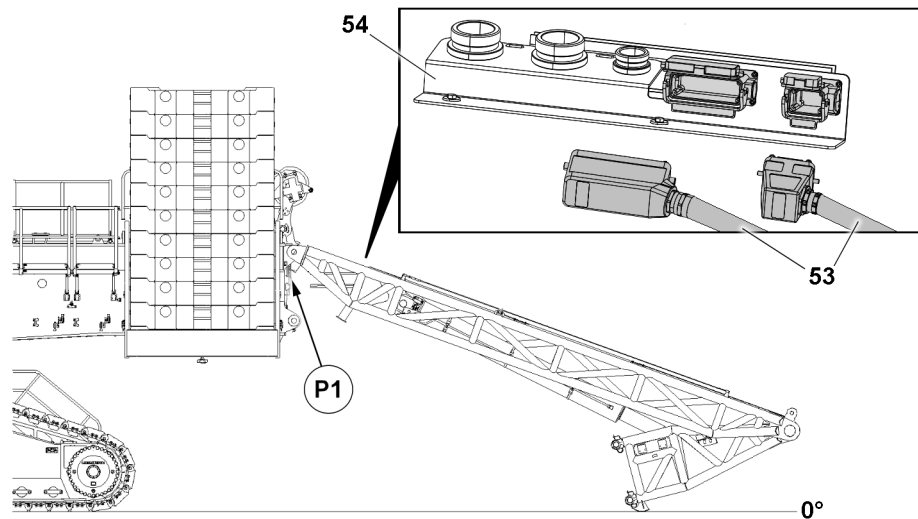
Disconnecting the electrical connection from the suspended ballast guide to the turntable
